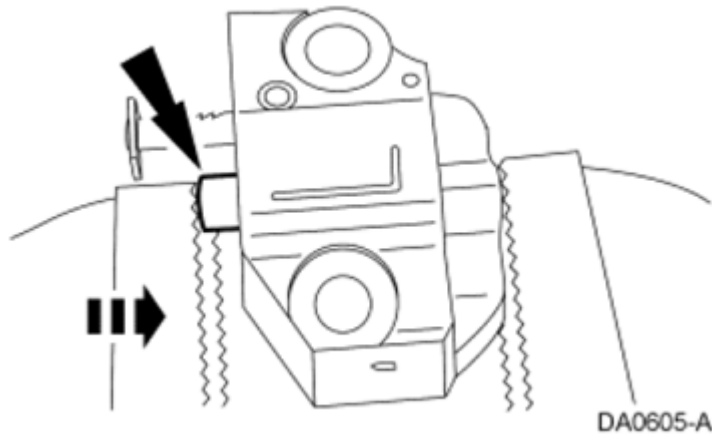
Compressing Each Tensioner Plunger Using Vise
